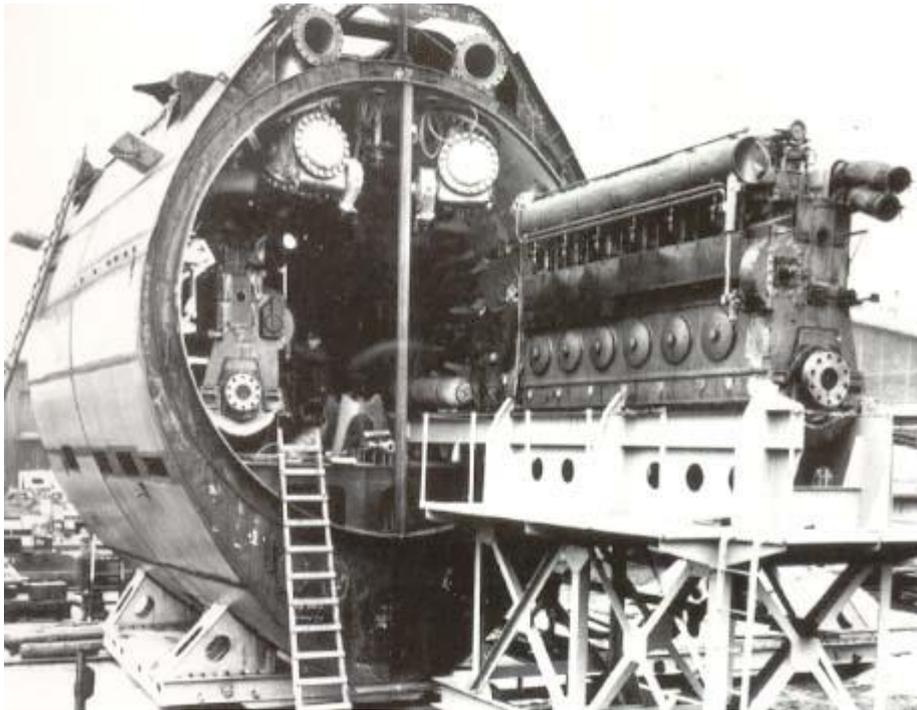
U-Boat construction in WWII, showing advanced blocks being used (source: forum.axisindustry.com)
